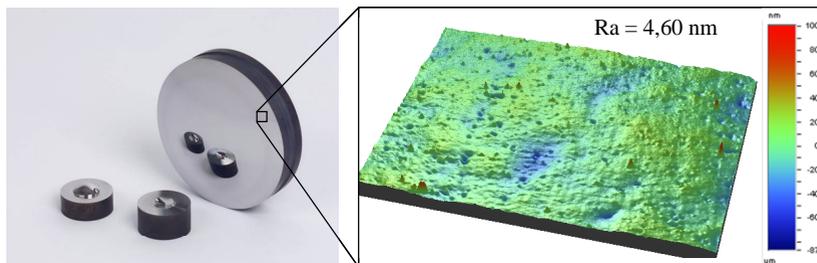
Diameter 75 mm mold (l.) and the surface topography of the mold (r.)
